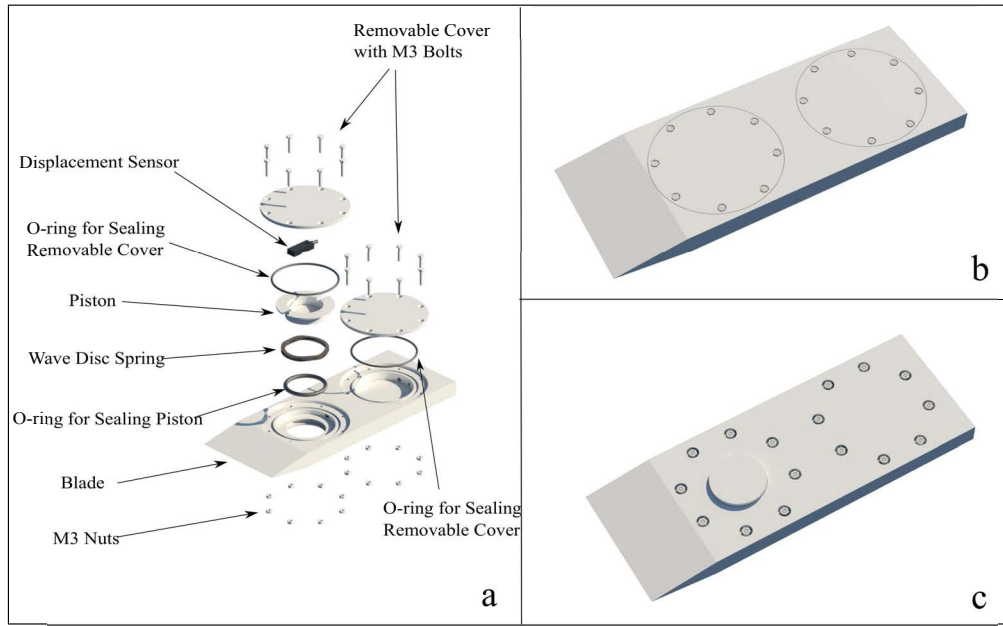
Schematic CAD-generated diagrams of the instrumented DMT blade (a) preassembly; (b) assembly in the top view; and (c) assembly in the bottom view
